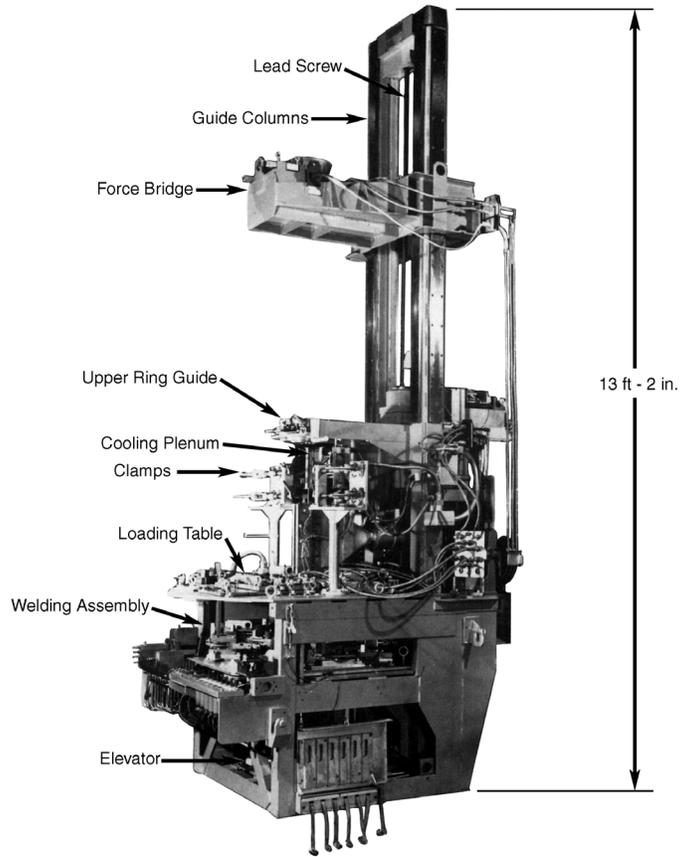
UNIVERSAL FUEL ELEMENT ASSEMBLY MACHINE.
